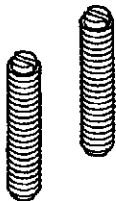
Valve Compressor Adapting Stud Tool 6715
